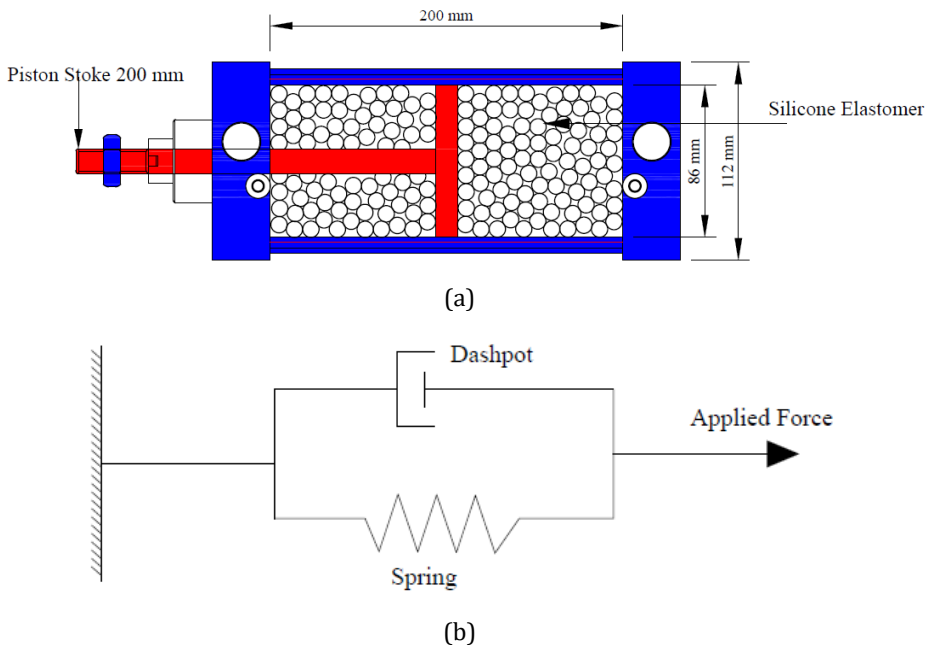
Pistone based cylinder damper (a) schematic diagram (b) Kelvin-Voigt mathematical Model [10]
